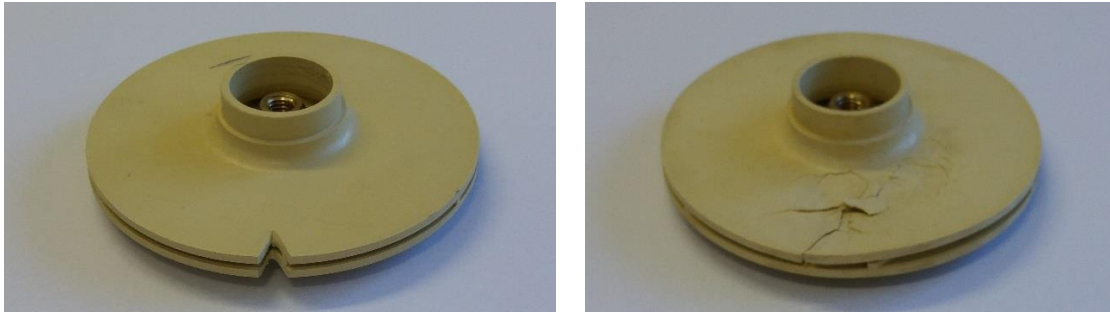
An illustration of common damages induced to an impeller (left) Unbalanced impeller, (right) Impeller with crack
